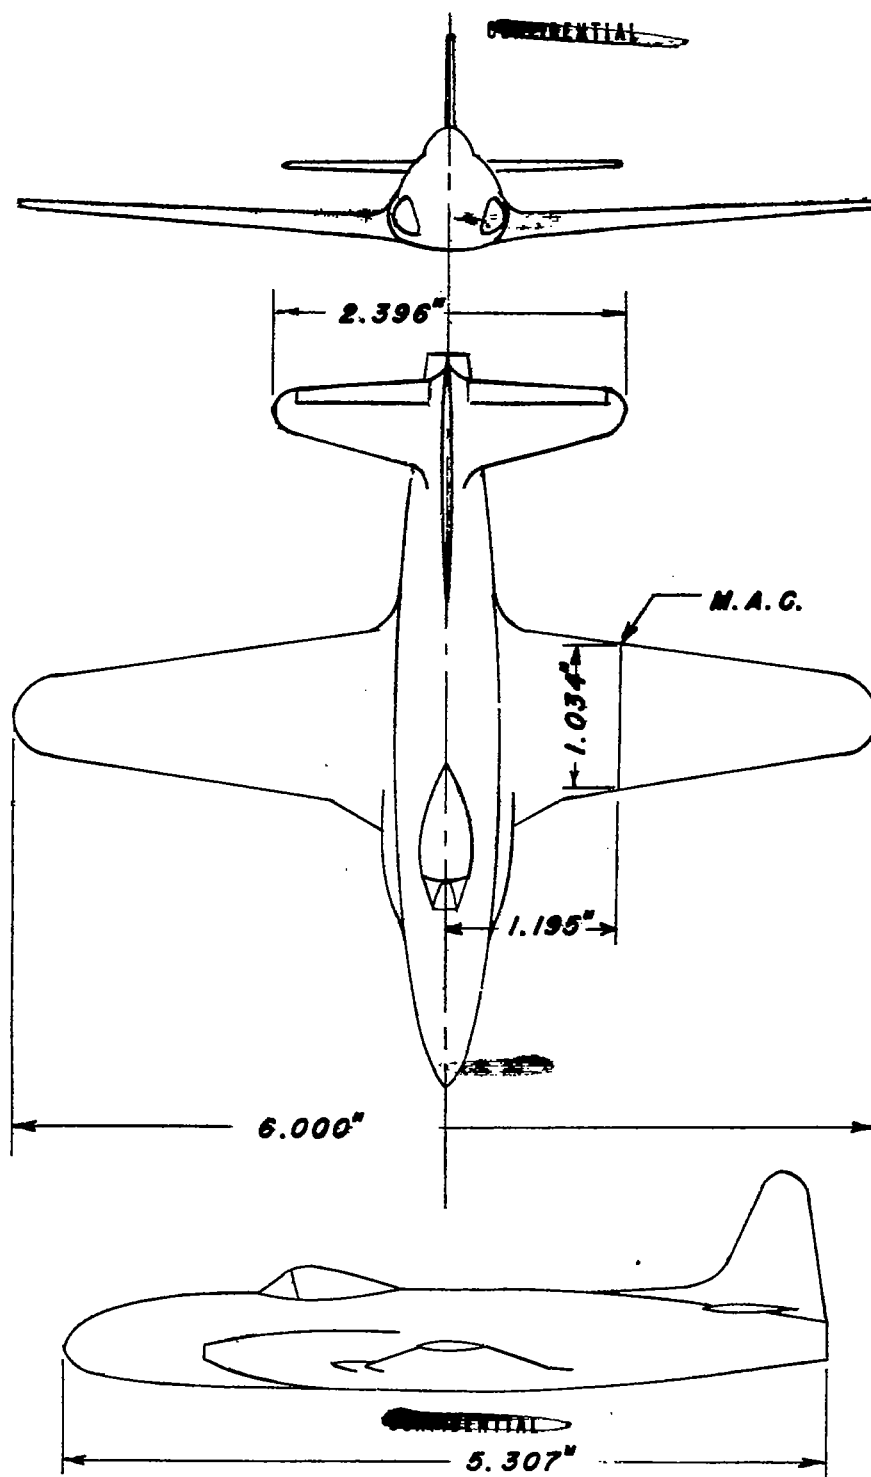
Three-view drawing of the 1/78-scale model of the YP-80A airplane.
